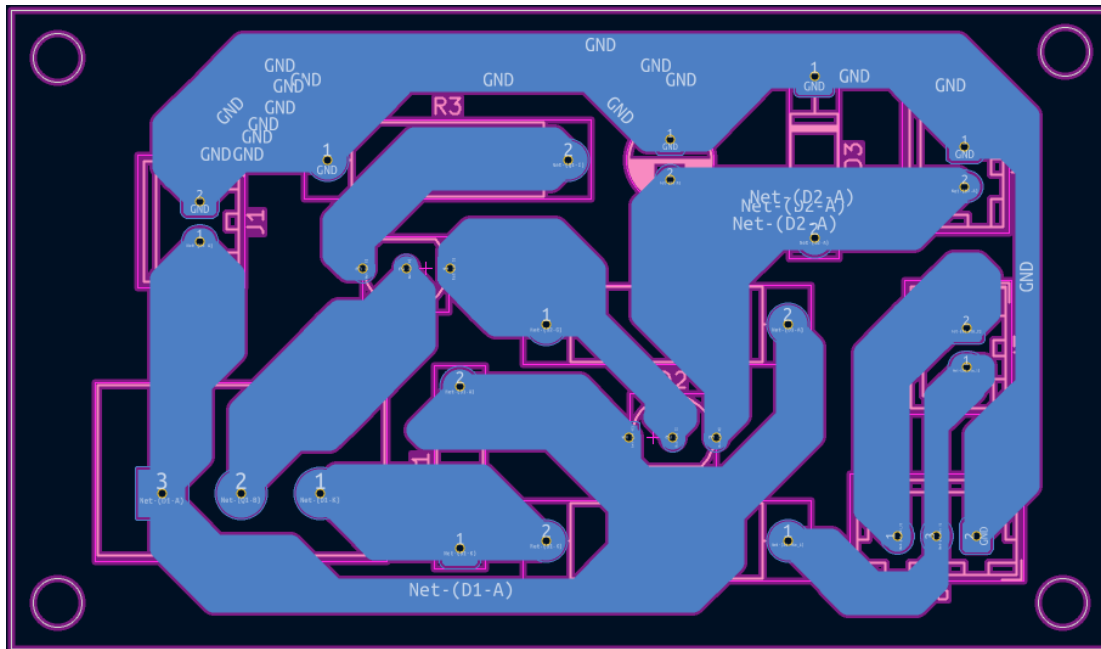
Original PCB layout showing the transistor-SCR based control board.
